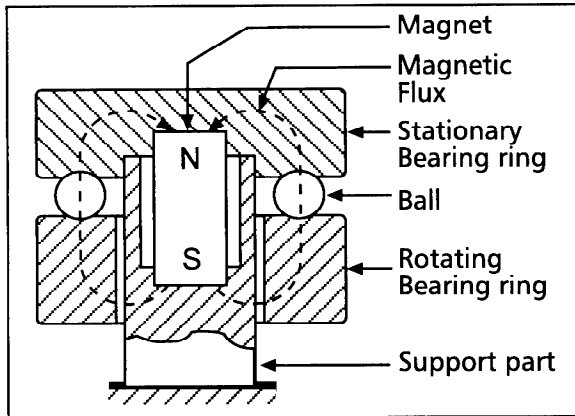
Magnetic Ball Thrust Bearing [7]
